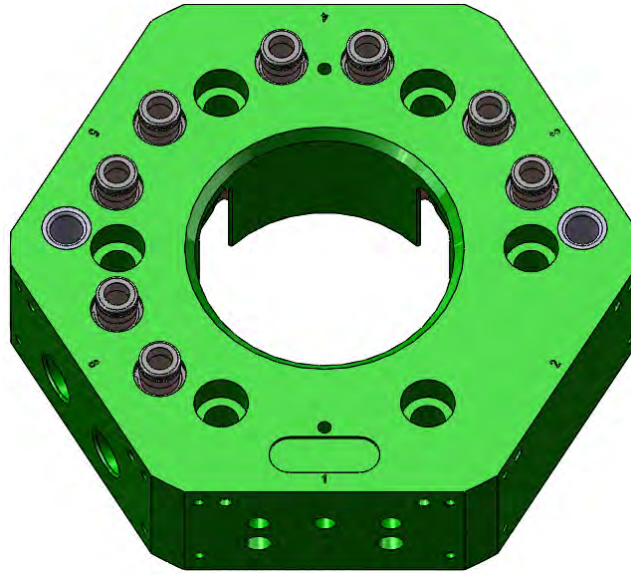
ET100 Tool Adaptor Visual Inspection
